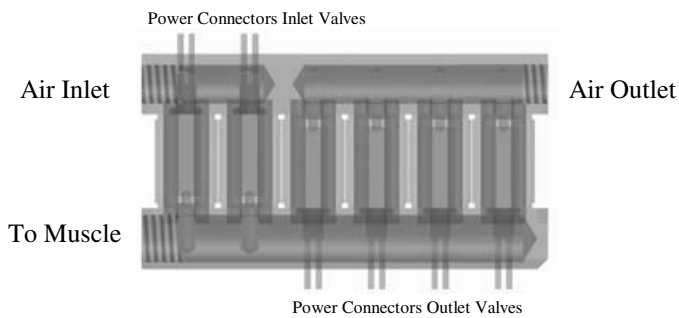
Pressure control block with 2 inlet and 4 outlet valve.
